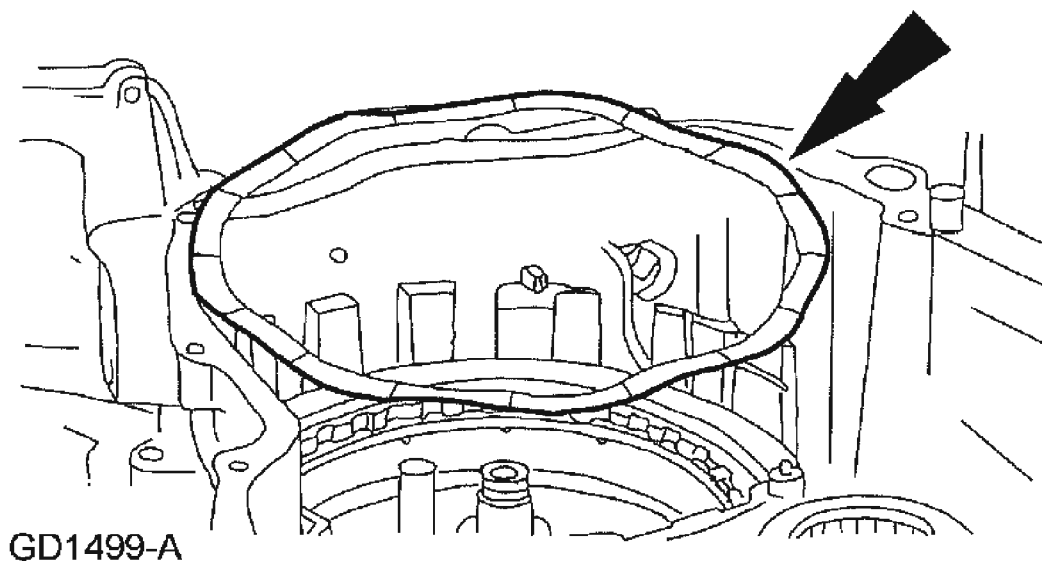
Identifying Transfer Equipped With Mechanical Diode
